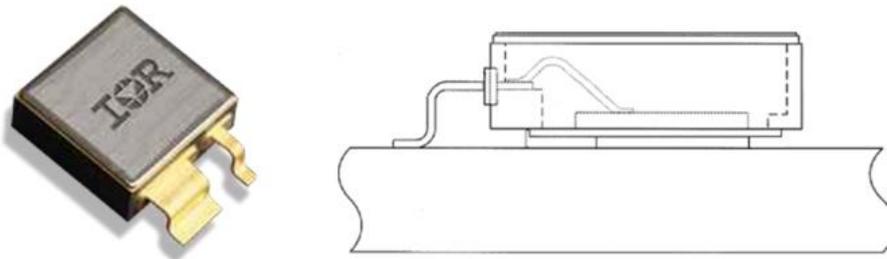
A SupIR-SMD package (left) and a cross-sectional view (right) showing chip and wire bond for the package mounted to a PCB.
